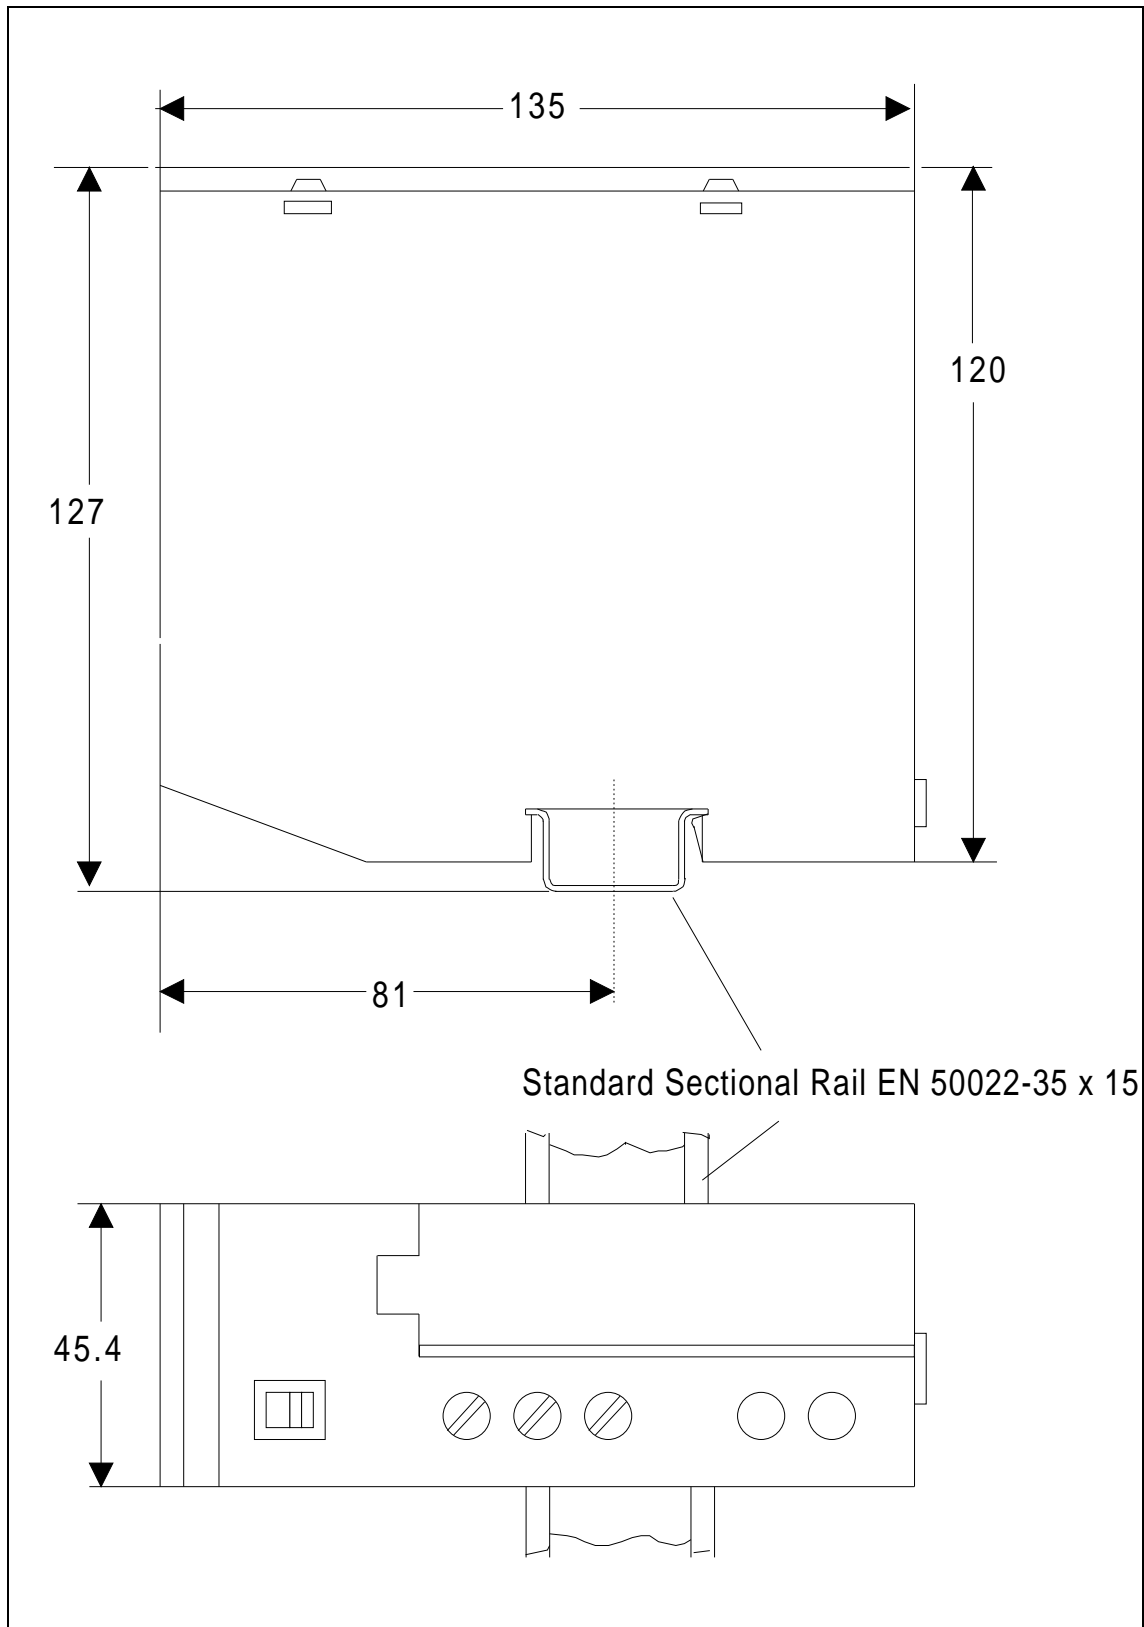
Dimension Drawing of the Power Supply Module PS 935
